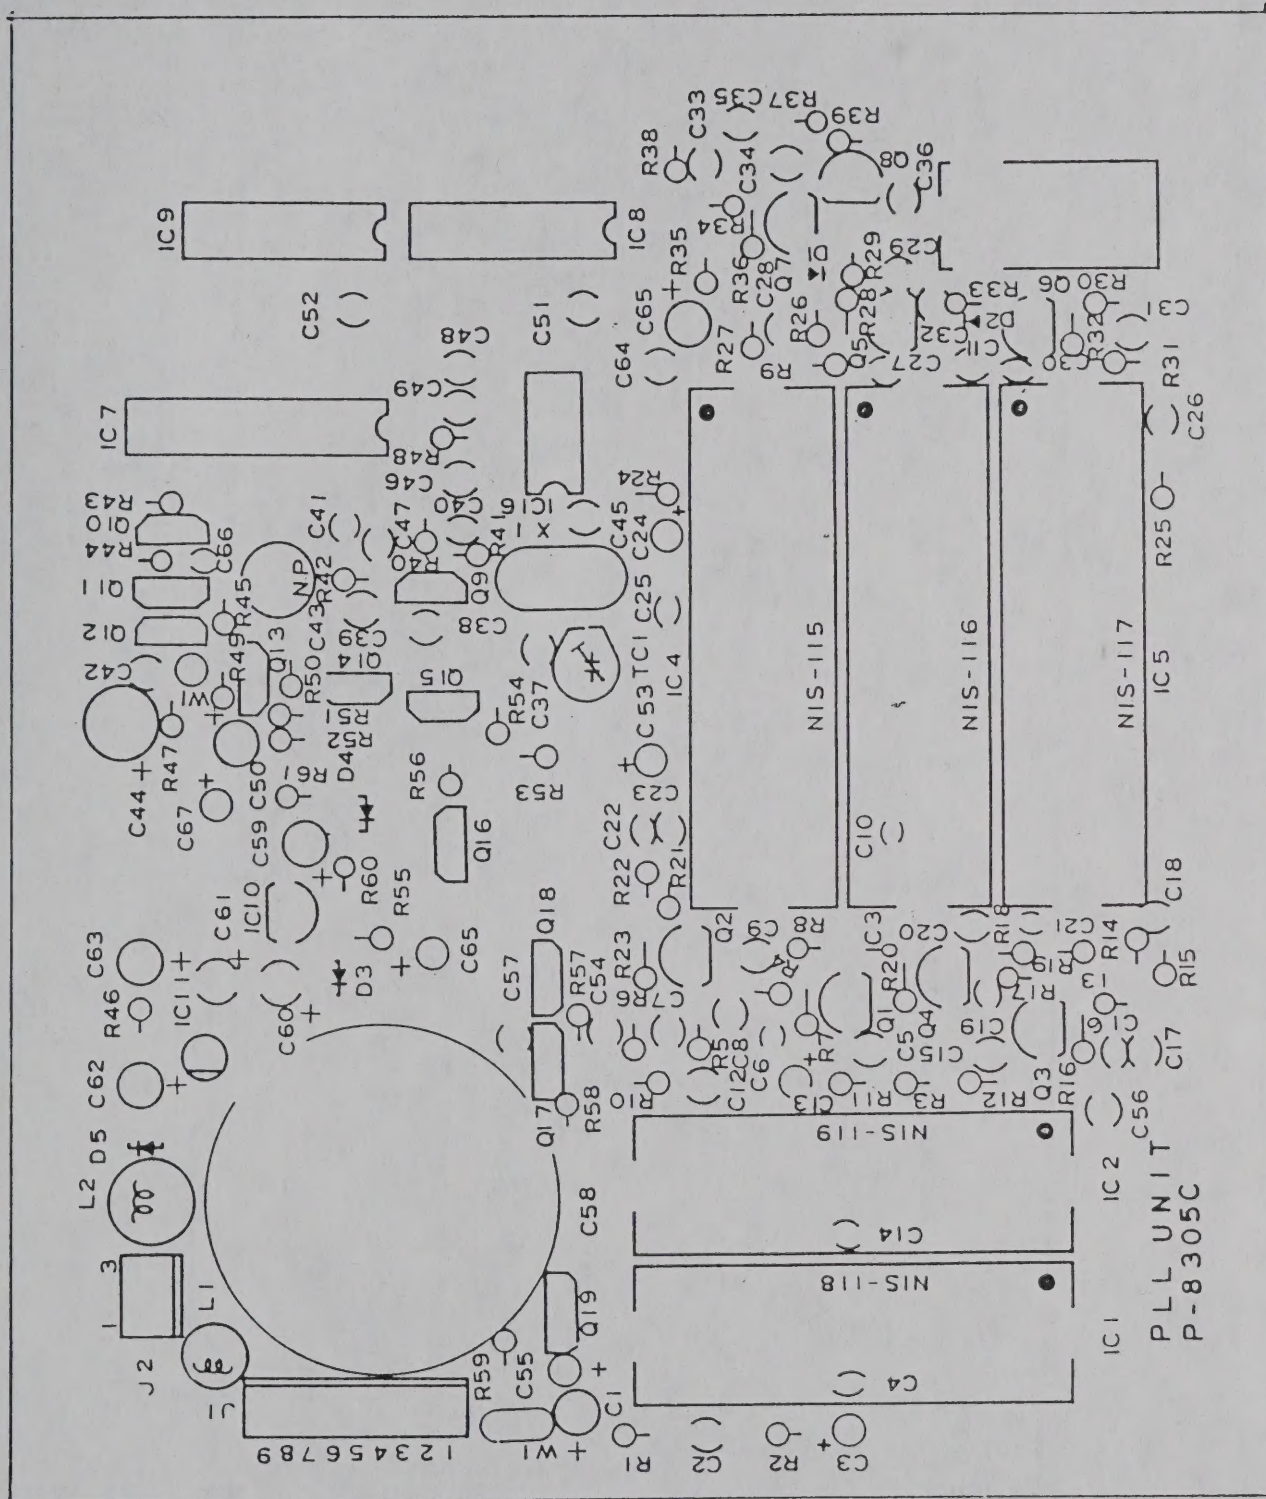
Parts Placement Diagram, PLL Board, MX7000
